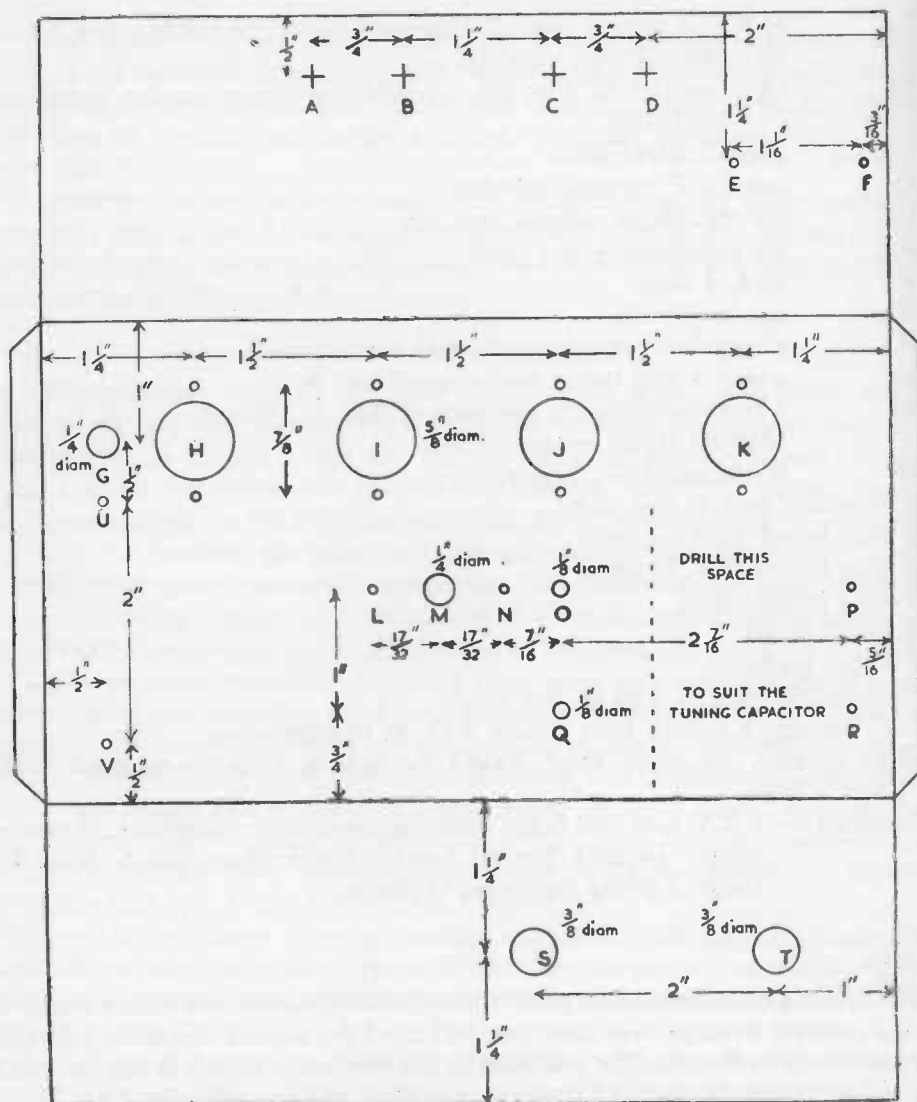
TOP VIEW OF THE CHASSIS, SHOWING HOW TO DRILL IT.
